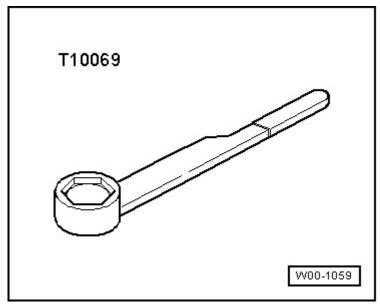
Counter-Holder Tool T10069 Courtesy of AUDI OF AMERICA, LLC
